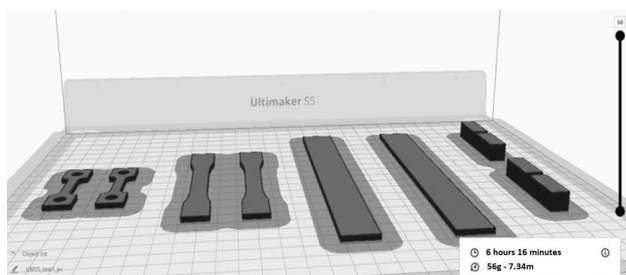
Flat X-Y build orientation and built plate adhesion (raft base) for the test specimens
